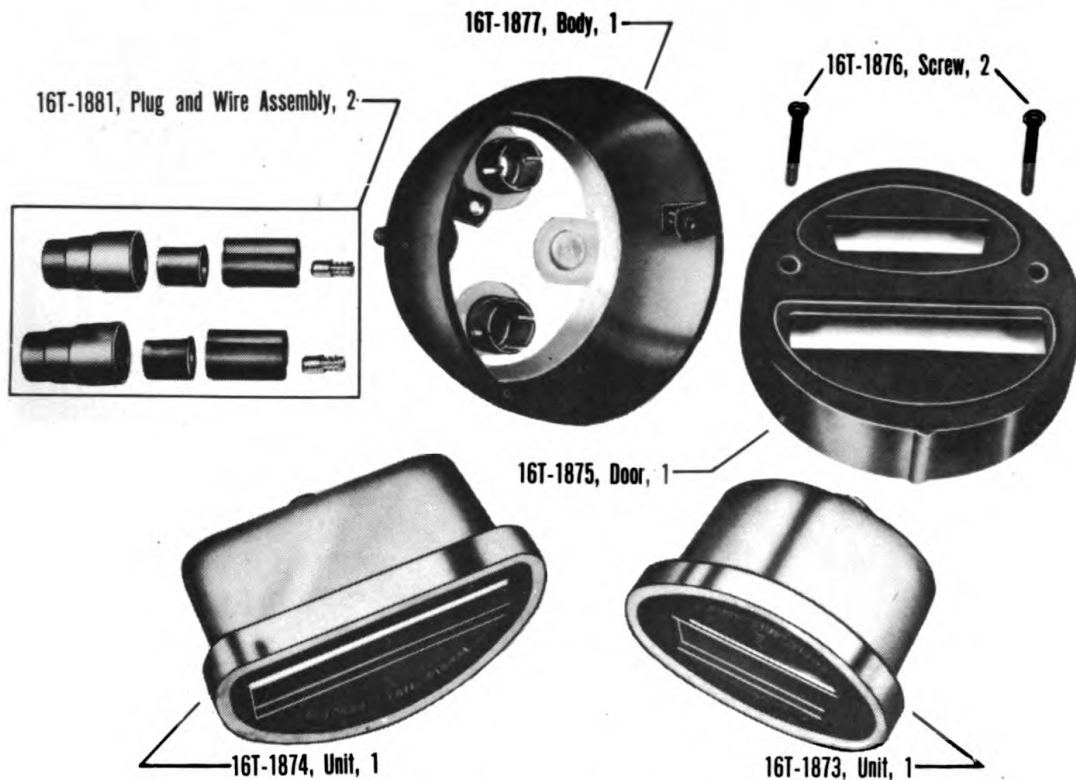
Blackout Stop and Blackout Tail Lamp Assembly 16T-1856
